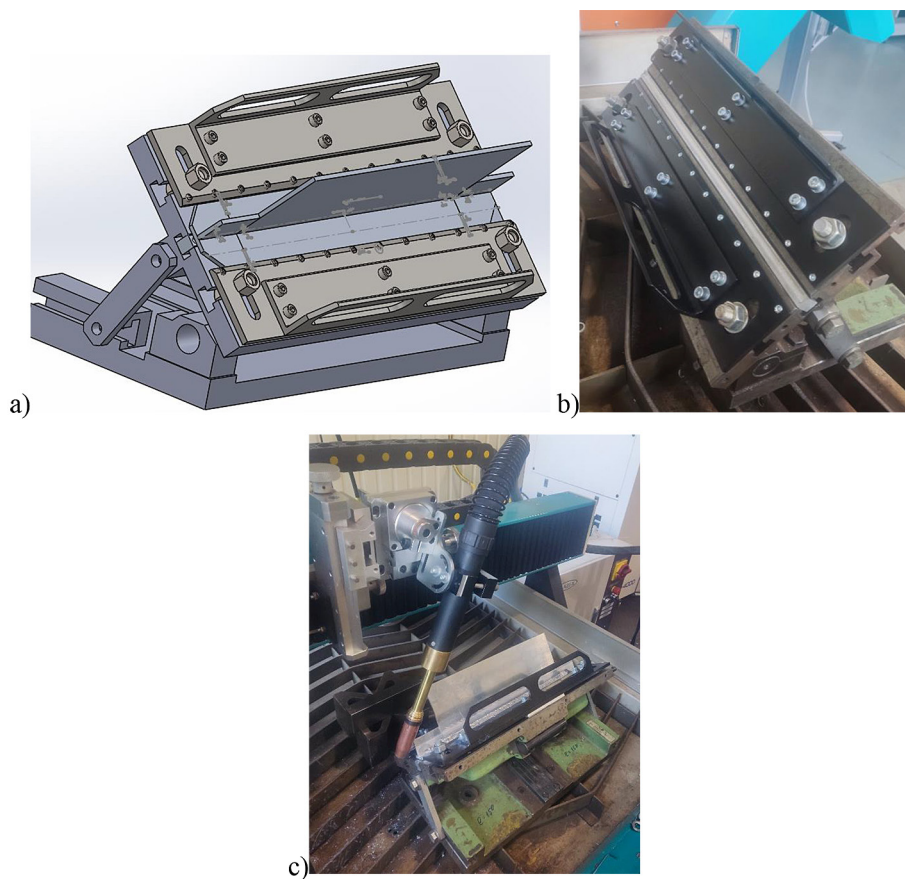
Laboratory facility for conducting the technological studies: (a), (b) – 3D-model and appearance of assembly-welding fixture for making butt and tee joints; (c) – appearance of a three-coordinate manipulator with a MIG-welding torch and mounted assembly-welding fixture
